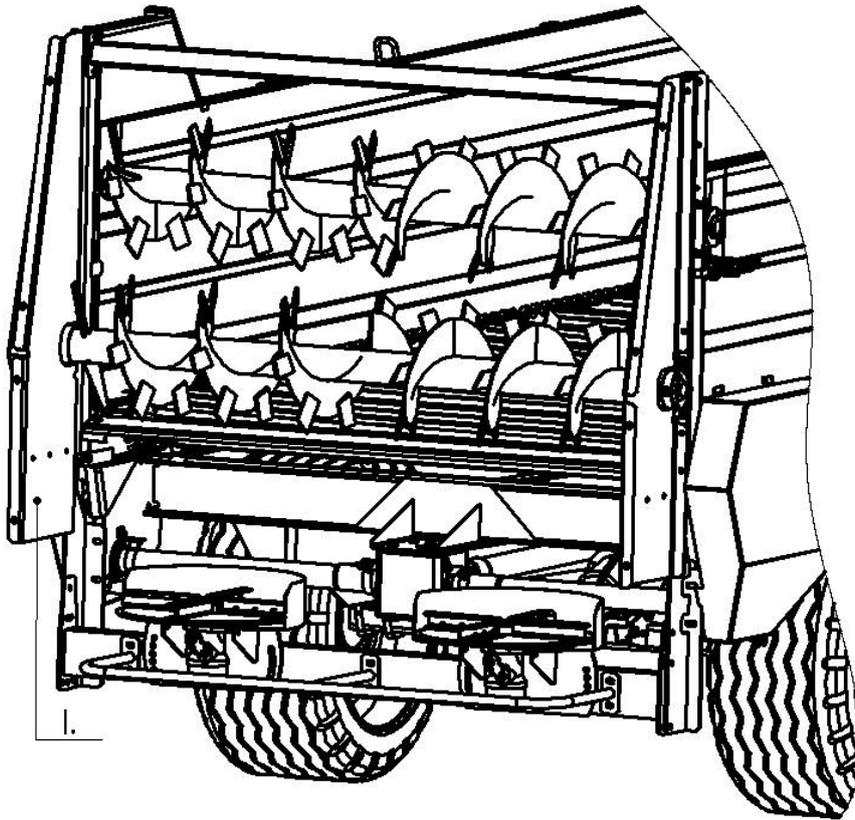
Step 7 - Mount side guards (l) on the adapter frame.
